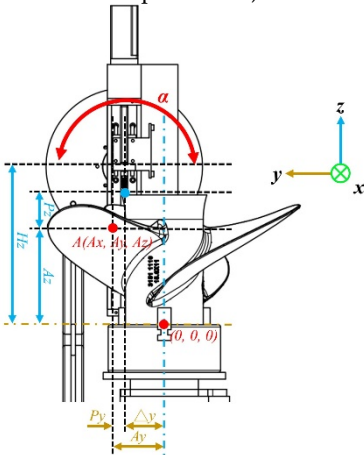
Front view of the propeller machining system (including the α -axis rotation and coordinate annotations).
